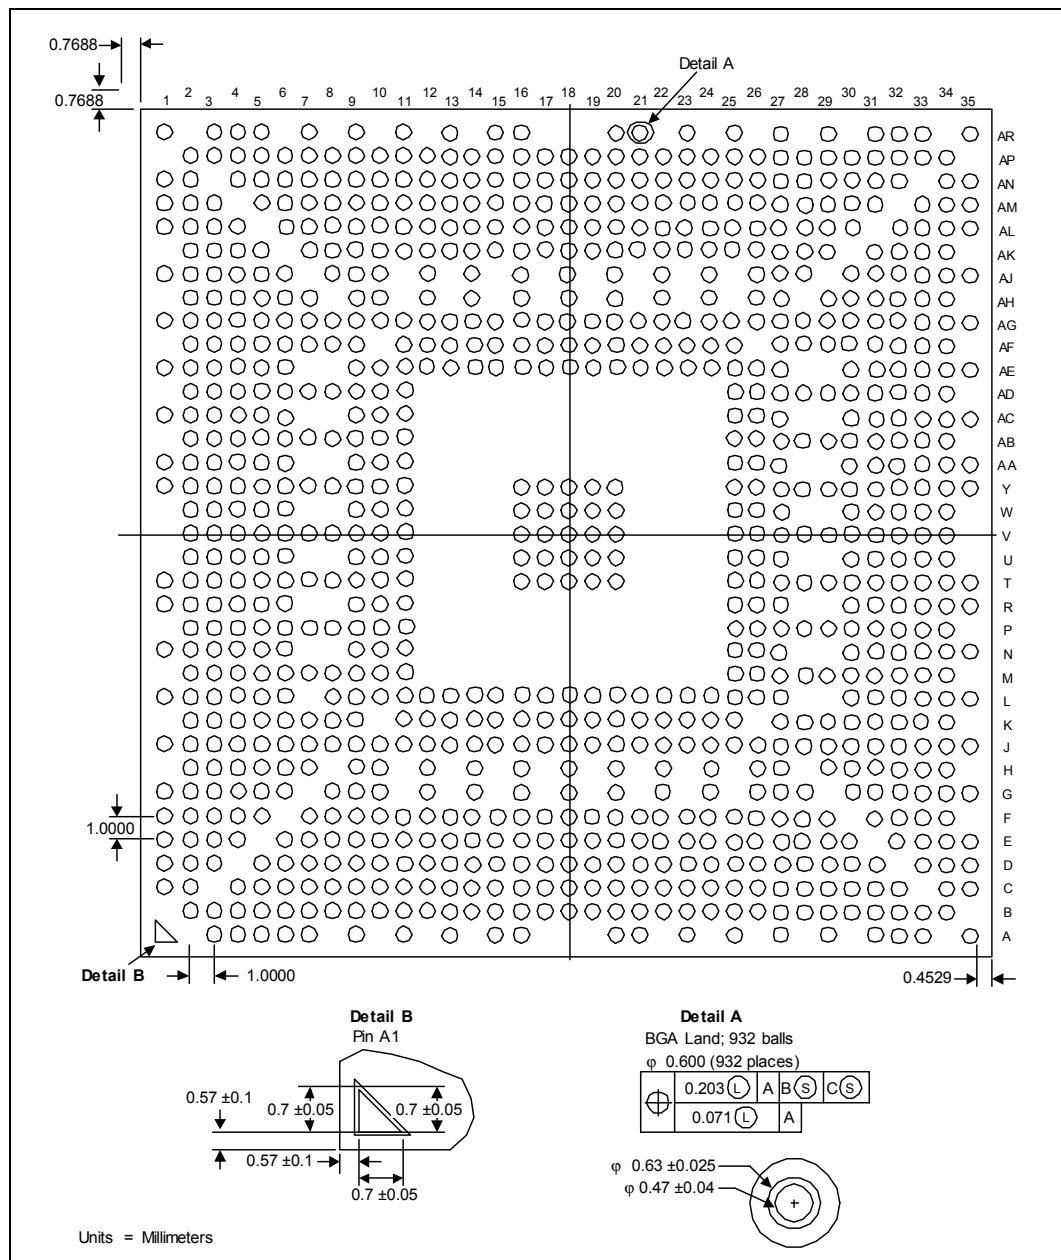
Intel® 82848P MCH Package Dimensions (Bottom View)
